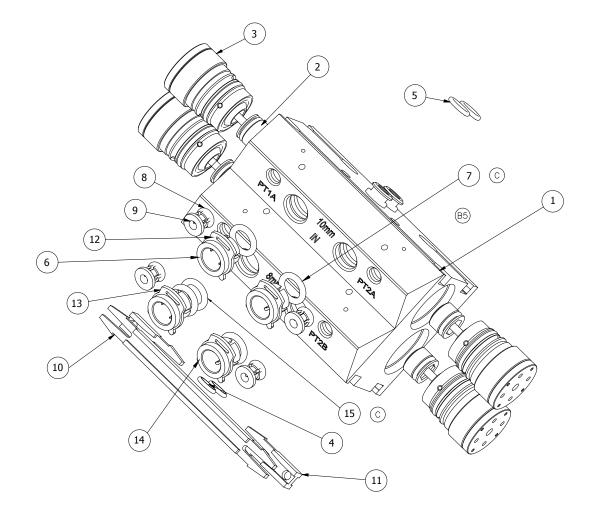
A10991 Dual Purge Circulating Assembly (Metric)
